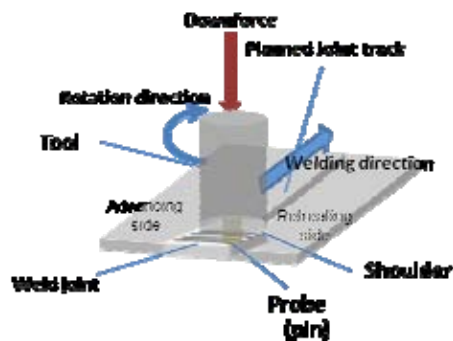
Principle of FS-welding and typical parameters to control.
